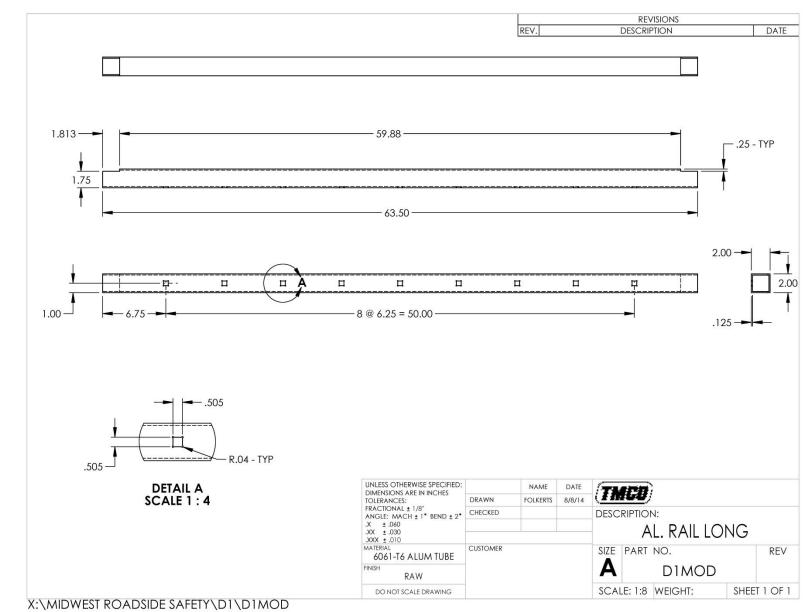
Fabrication Drawings, Test Nos. APR-1 and APR-2
